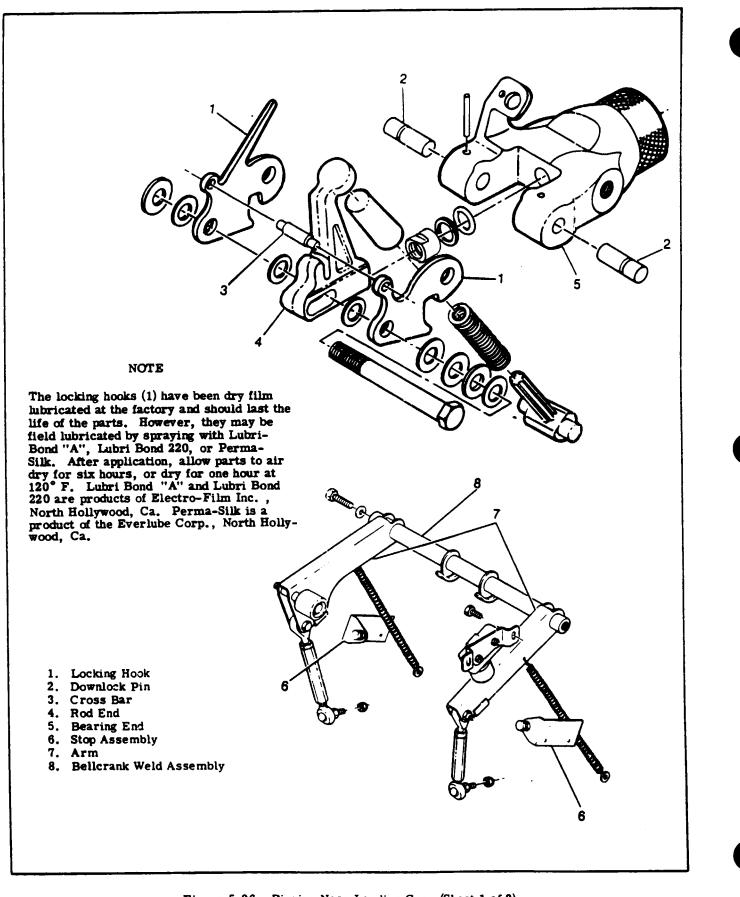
Rigging Nose Landing Gear (Sheet 1 of 2)
